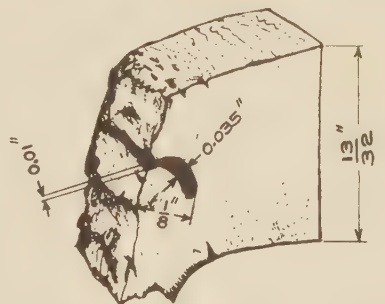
FRACTURE OF BENDING TEST (Electric-arc double-V butt weld. See Figs. 30 and 31.)
